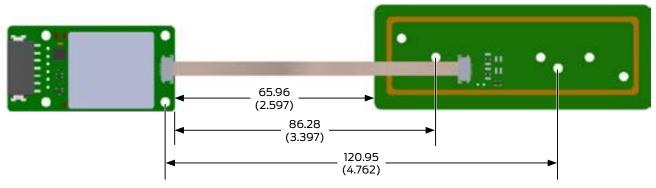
Dimensions of the OEM 200 Board connected to a 90 mm Antenna. Dimensions shown are in mm (inches).
